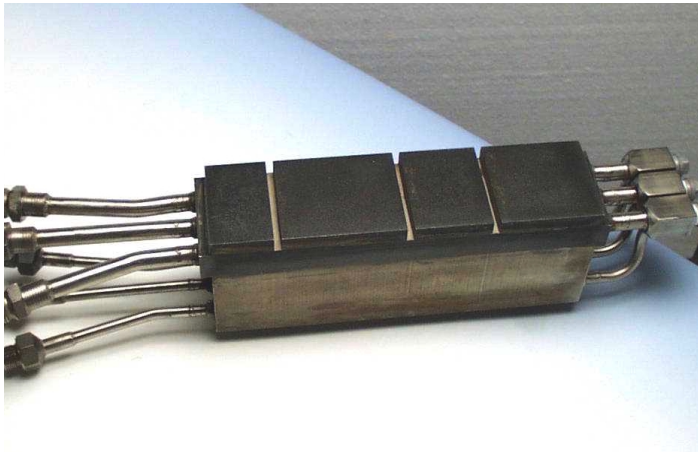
FW mock-up with HIPed Be armour(EUHT) Fig. 17 Blanket module prototype(JAHT)
